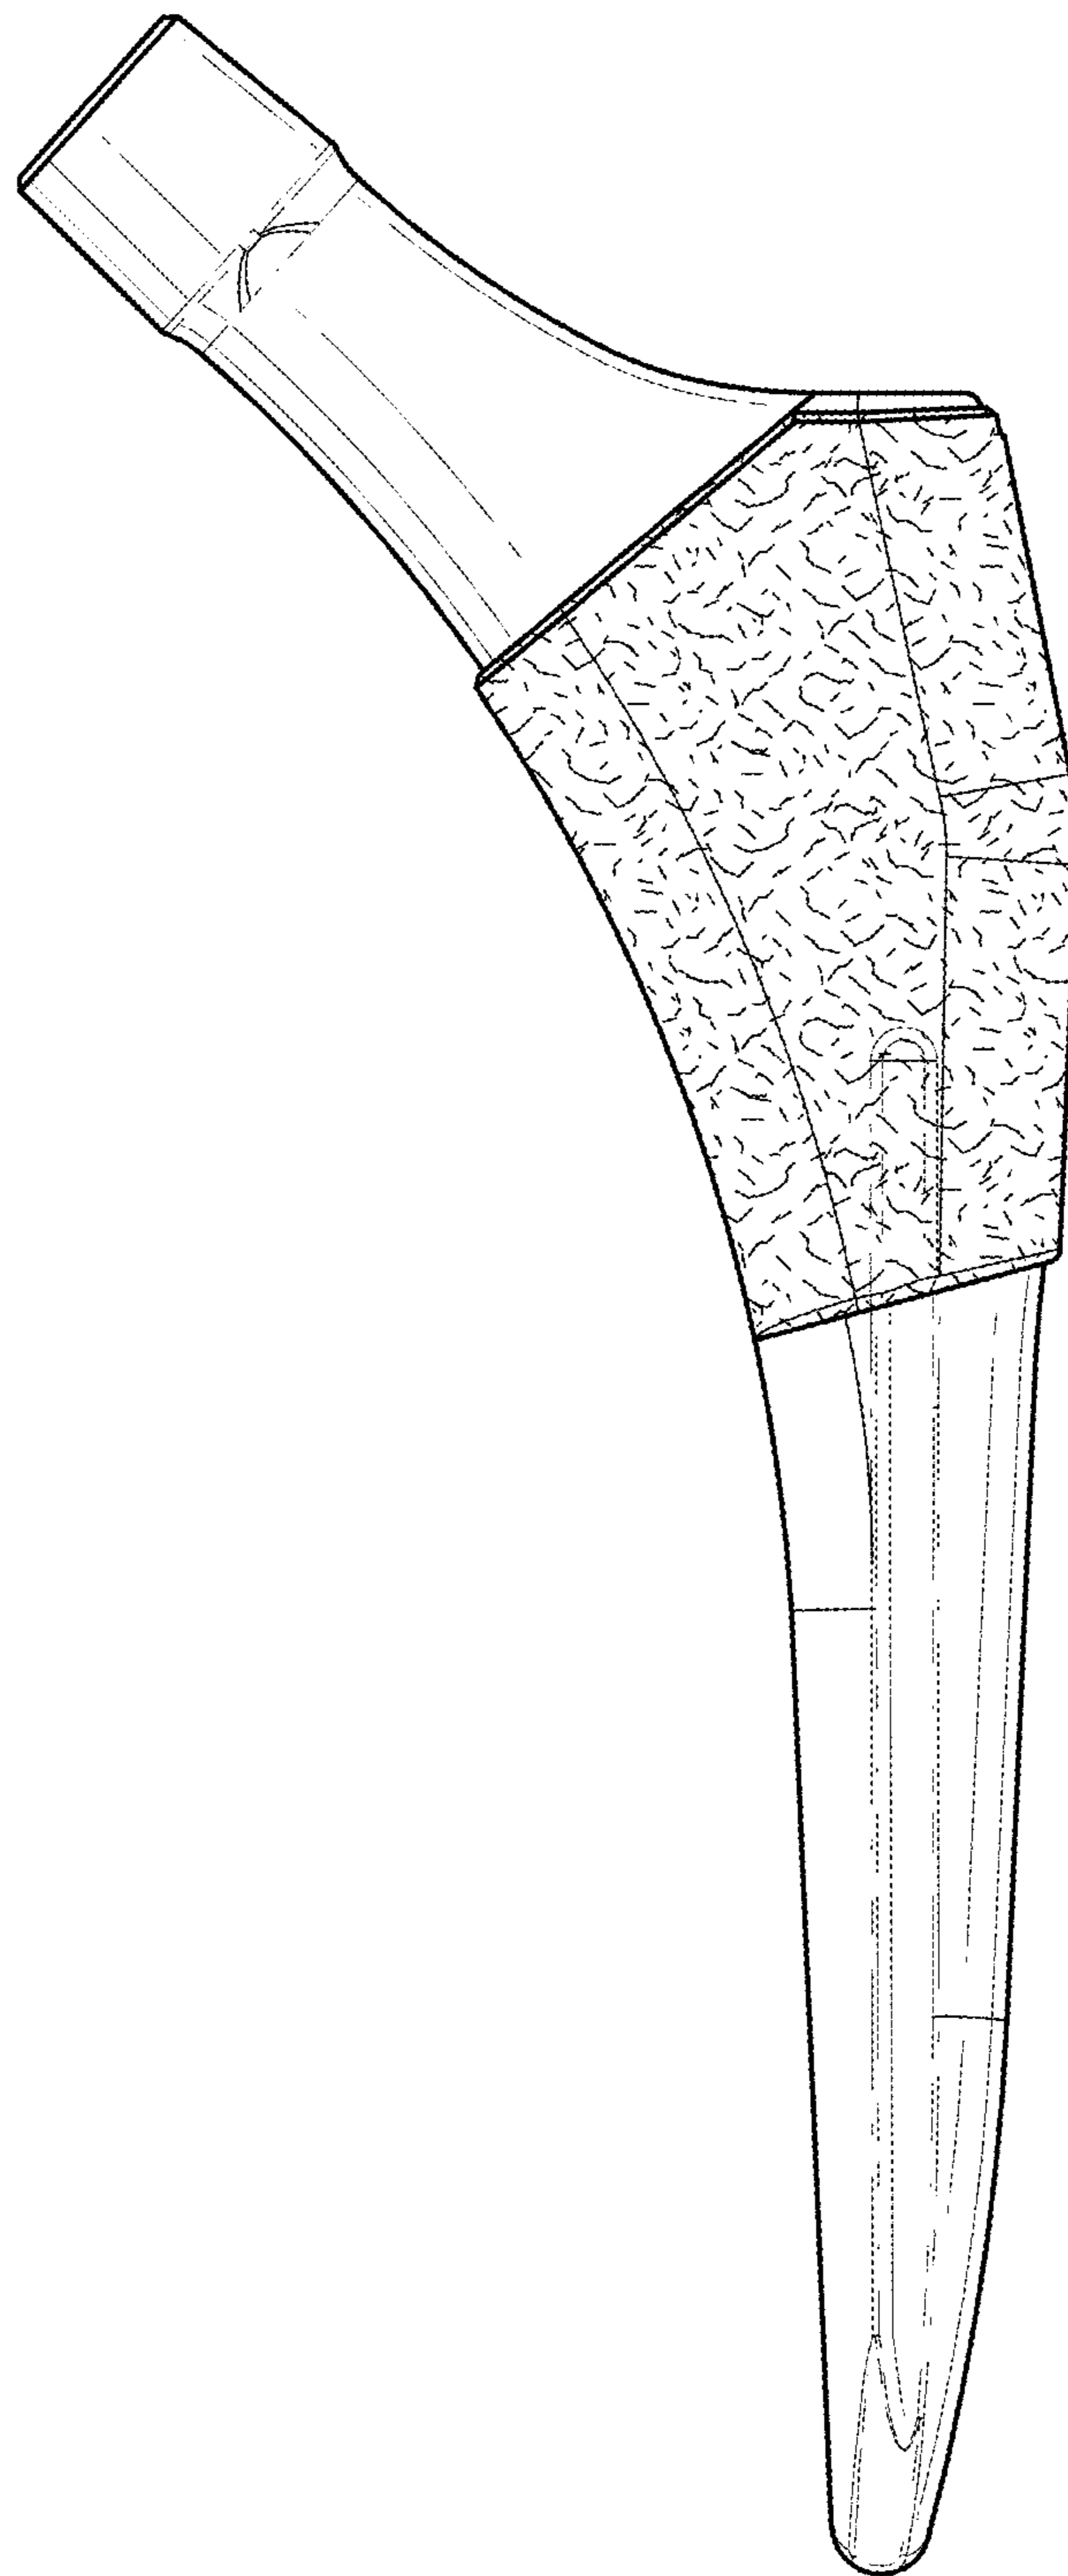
is a perspective view showing the front, top and left sides of the femur stem with medially recessed porous coating;
